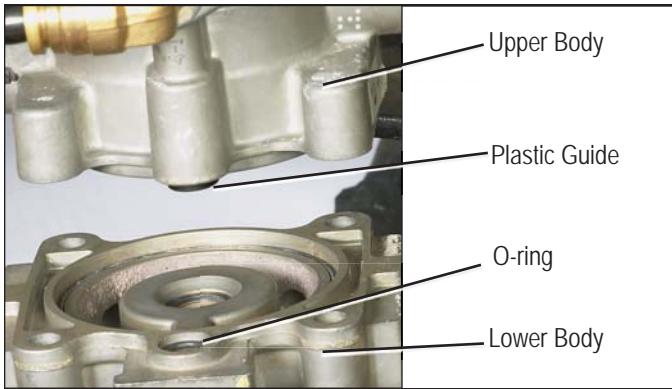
PLASTIC GUIDE AND O-RING SEAL
